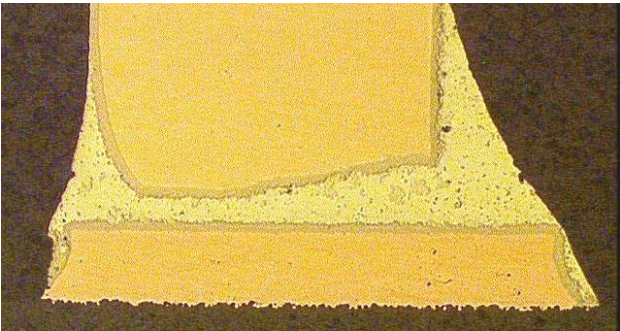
TOLC/SOLC Connector, Pb Free, Typical Solder Joint
